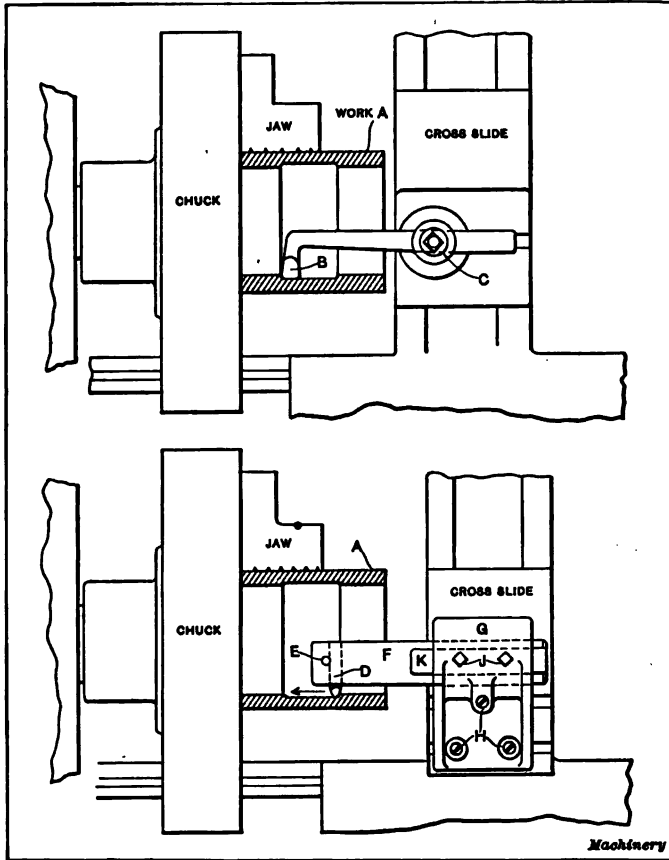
Two Simple Types of Recessing Tools for the Engine Lathe
